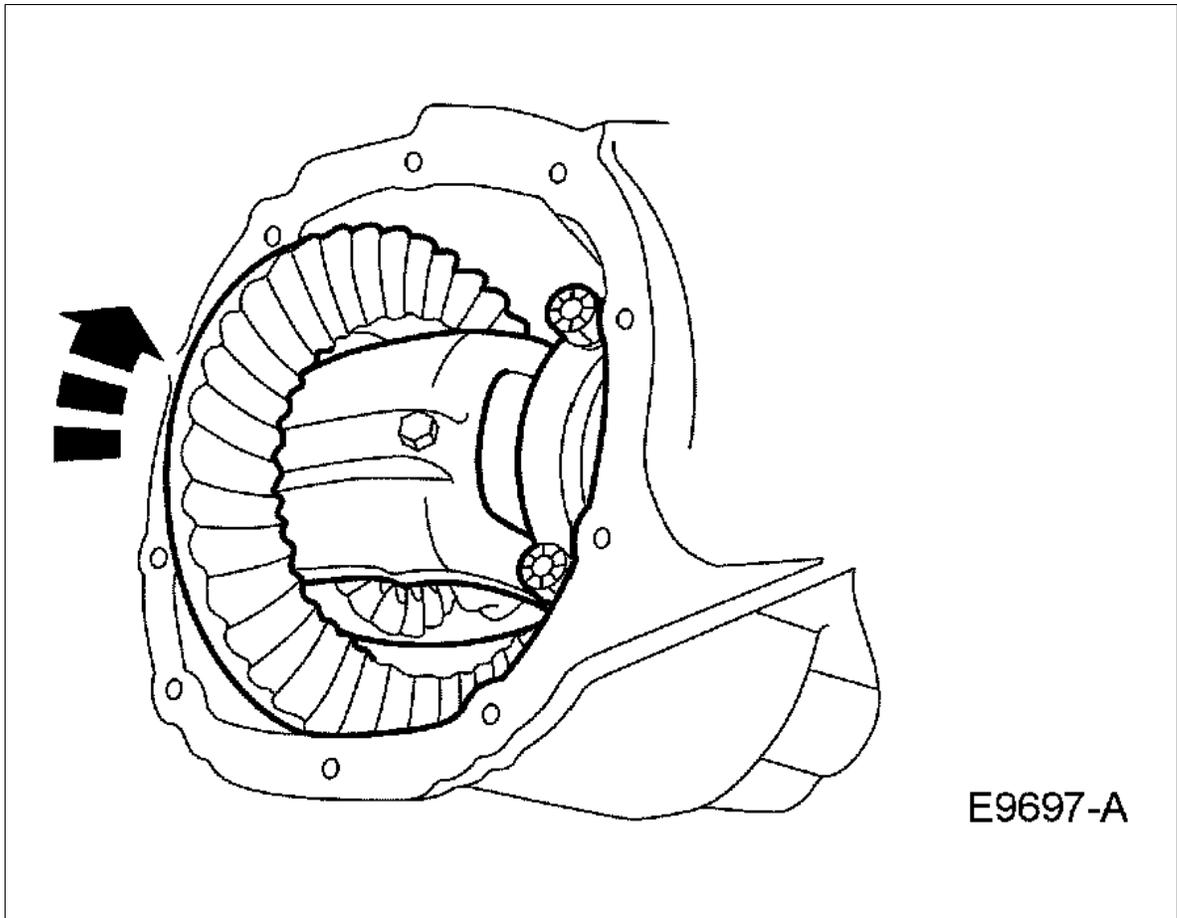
Installing Right Side Differential Bearing Cap And Tightening Left Side And Right Side Bolts
